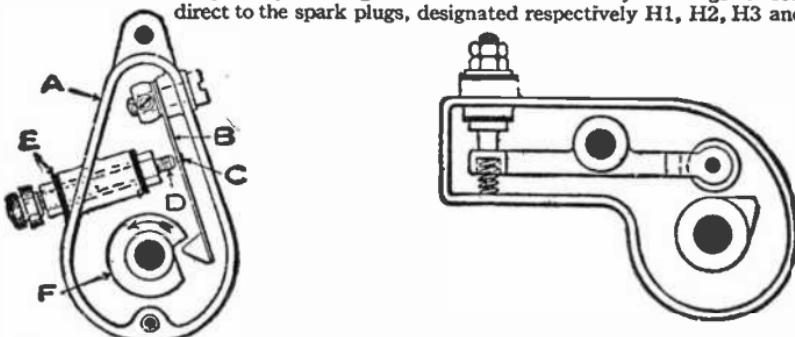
,009.—A contact maker and mechanical vibrator or *trembler*. The case A, is usually attached to the gear box of the engine; B, is the blade; C, a platinum contact point; D, an insulated adjusting screw; E, a bushing with insulation; F, the operating cam. As this cam revolves, the weight on the end of blade B, drops into the recess on the cam, causing the blade to vibrate and make a number of contacts with D, thus producing a series of sparks when in operation.
